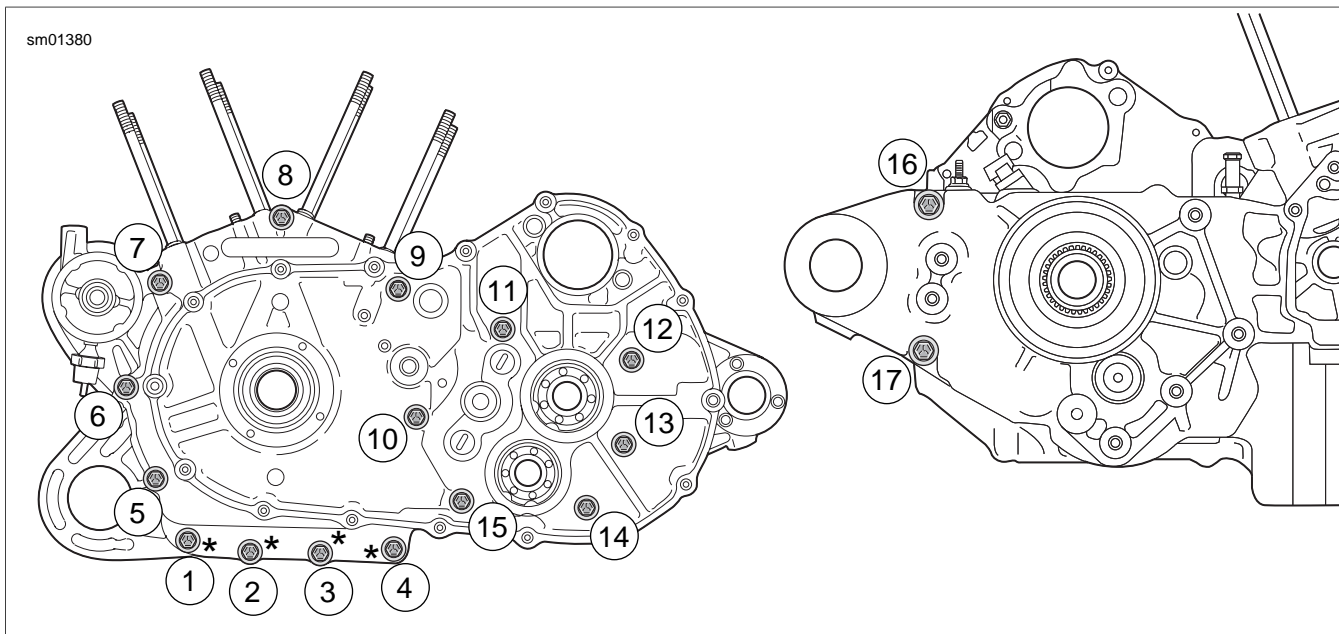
Crankcase Fastener Torque Sequence (* - Short Fasteners)
